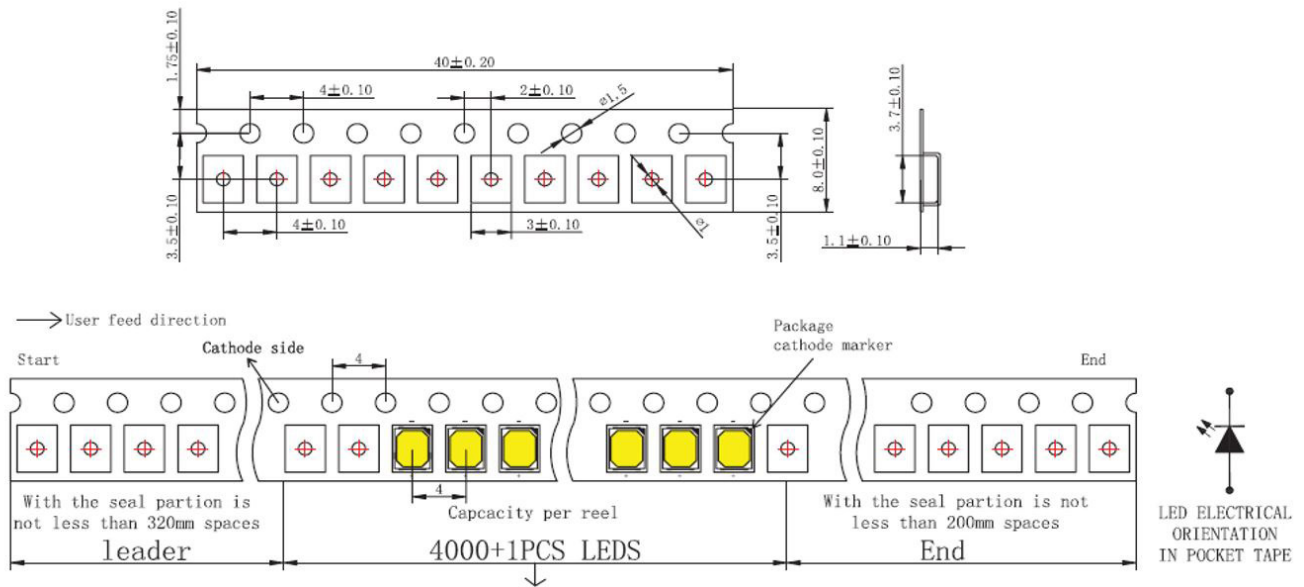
Pocket tape dimensions for LUXEON 2835 Commercial Deep Dimming
